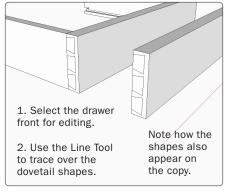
Create the half-blind dovetail shapes in the drawer front.
